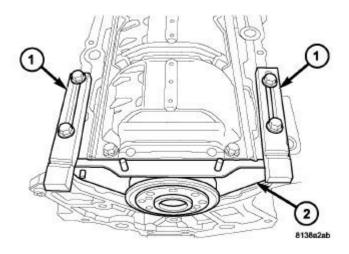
REAR MAIN - SPECIAL TOOL 8225 Courtesy of CHRYSLER LLC
